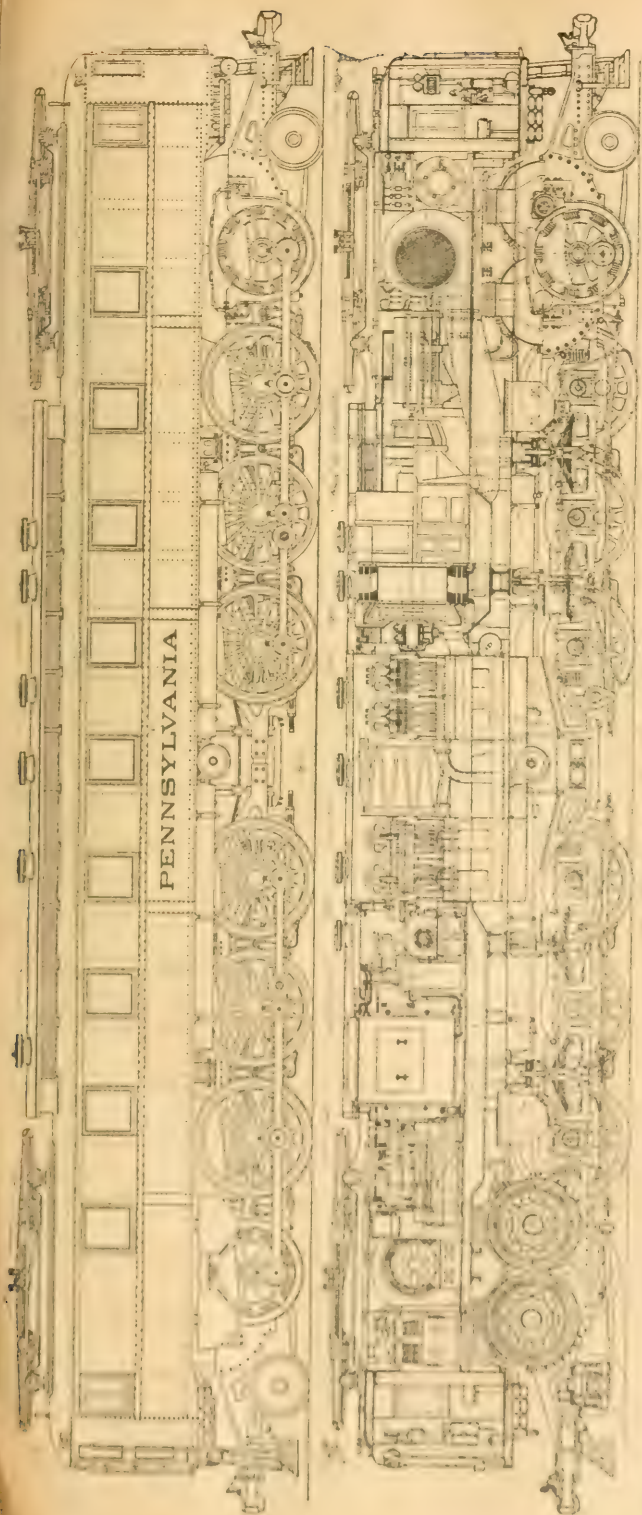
ELEVATION AND SECTION OF LOCOMOTIVE.
